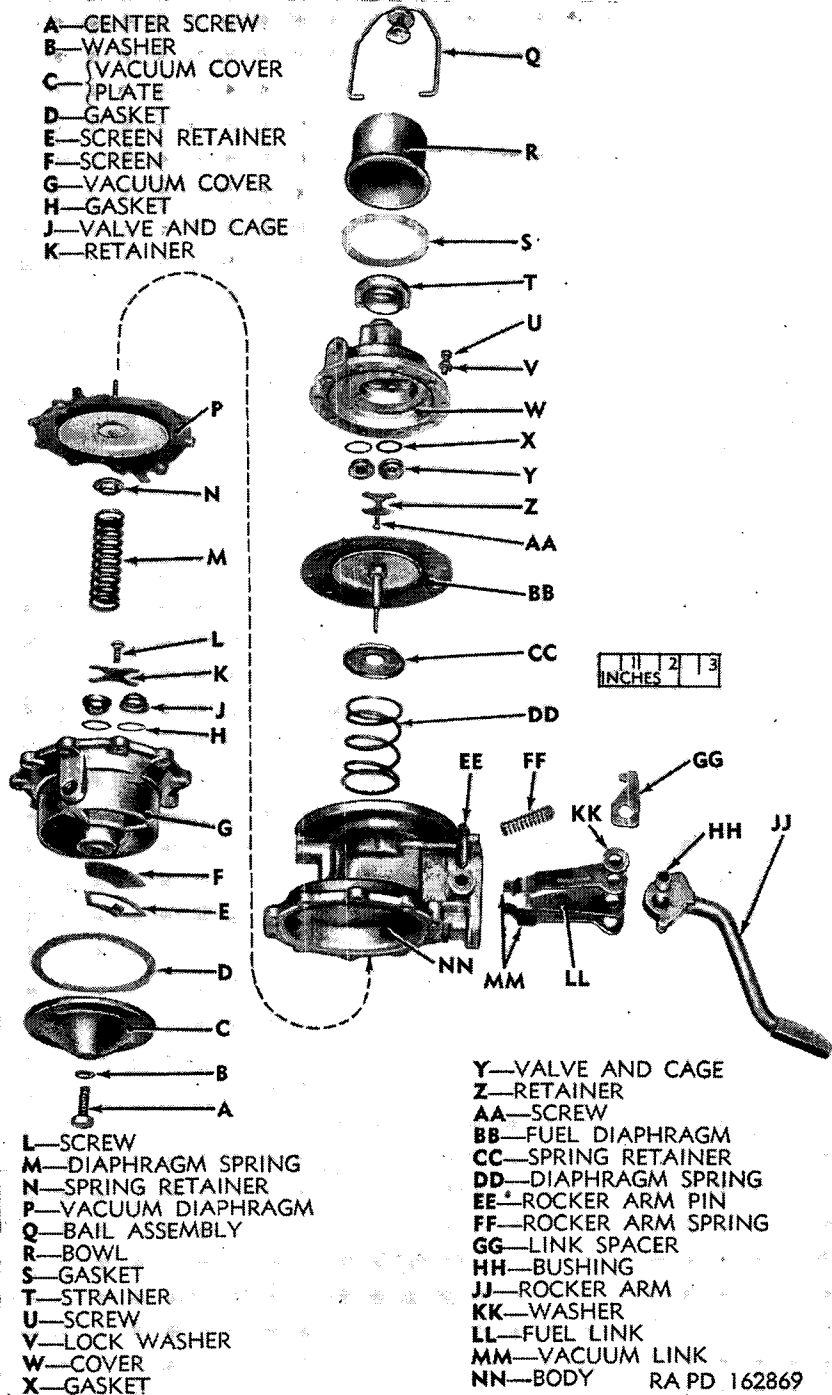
Fuel and vacuum pump—disassembled (typical series AX construction).
